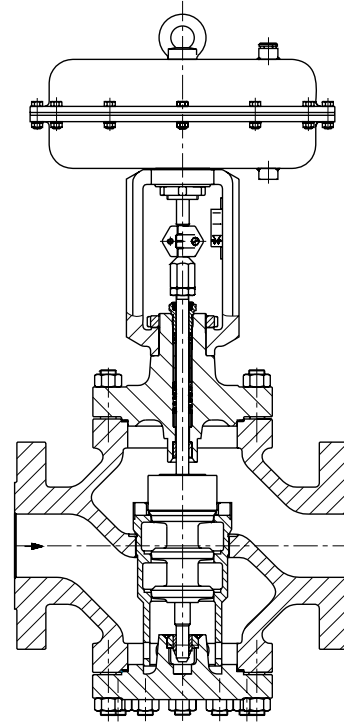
· Type 3255-1 Pneumatic Control Valve with a three-stage axial plug
